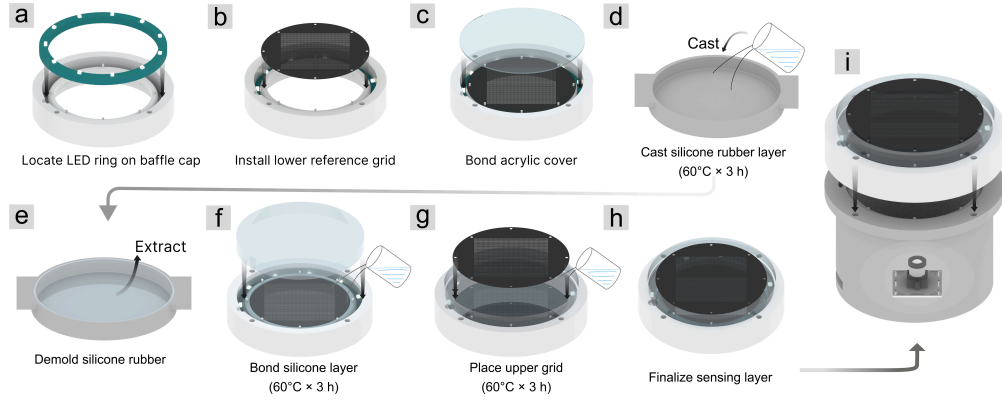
Fabrication process of MoiréTac sensor showing assembly steps. (a-c) Optical base assembly with LED ring positioning on baffle cap, lower reference grid installation, and acrylic cover bonding. (d-f) Elastomer layer preparation including silicone casting at 60°C for 3 hours, demolding, and thermal bonding to acrylic substrate. (g-h) Sensing layer completion with upper grid placement and final assembly. (i) Fully integrated sensor with camera.
